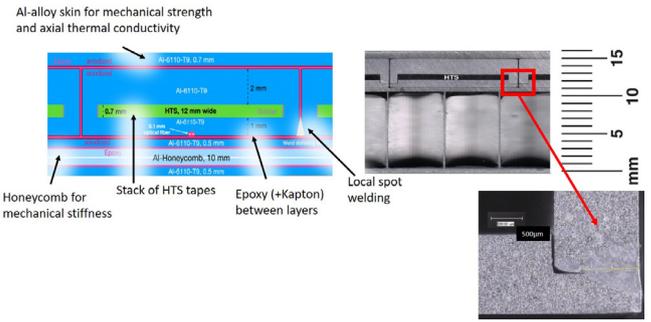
Cross section of aluminium jacket and honeycomb structure for mechanical support of HTS tapes. The lower right inset shows the welding of the aluminium jacket.
